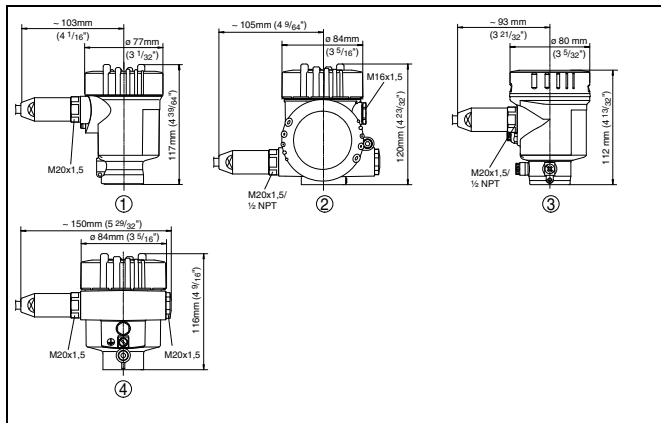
Housing versions in protection IP 66/IP 68, 1 bar (with integrated indicating and adjustment module the housing is 9 mm/0.35 in higher)
